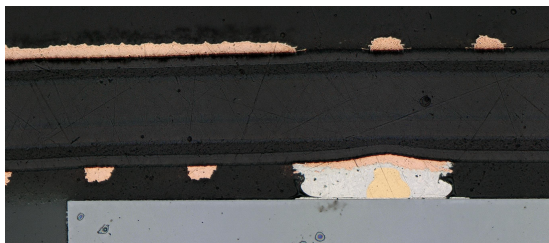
Cross-section of the gold stud to solder paste interconnection showing excellent wetting of the gold stud.
